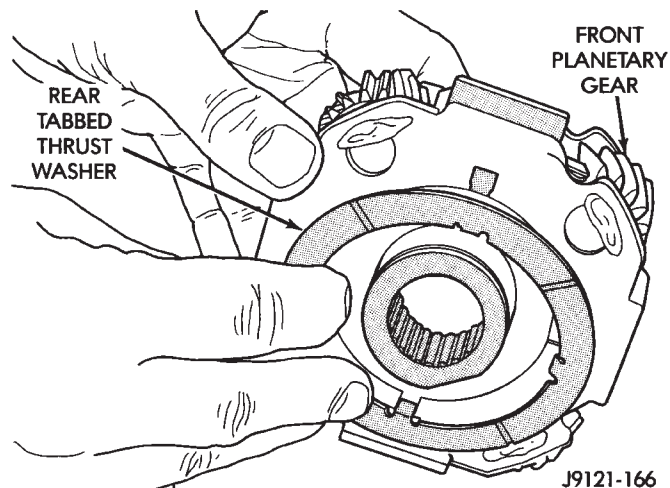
Installing Rear Thrust Washer On Front Planetary Gear
